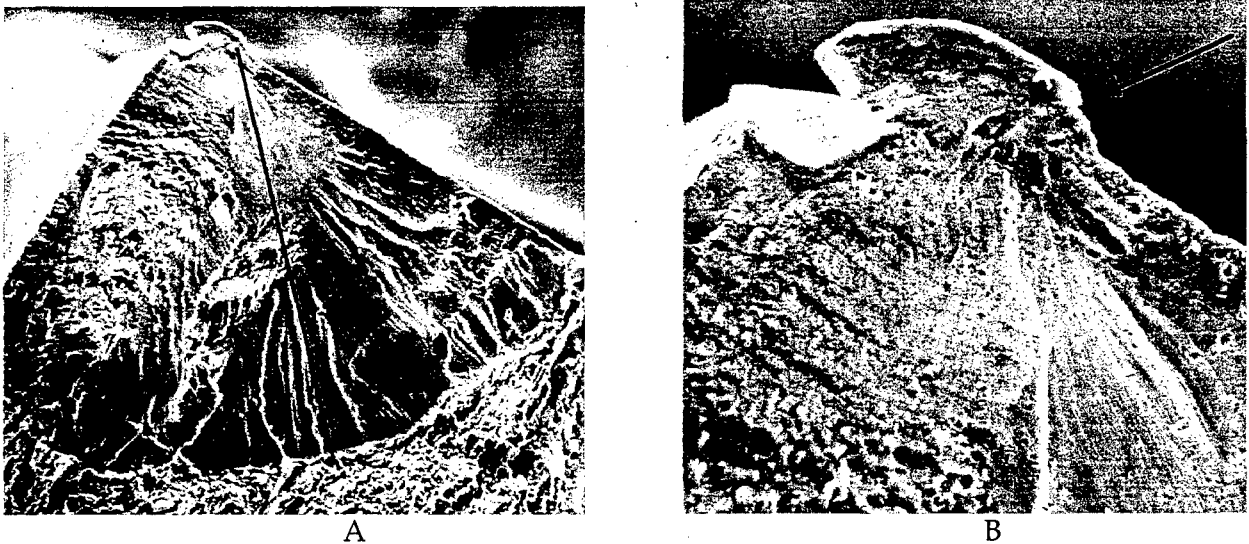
The crack profile and initiation area of the second crack in the starboard lower aft wing-attachment wing-attachment-hole edge. Note that the initiation is associated with a lip caused by damage to the edge of the hole. The line shown in view A designates the approximate line followed during fractography. Cracking initiated on the hole bore surface at the back of the lip (arrow).
